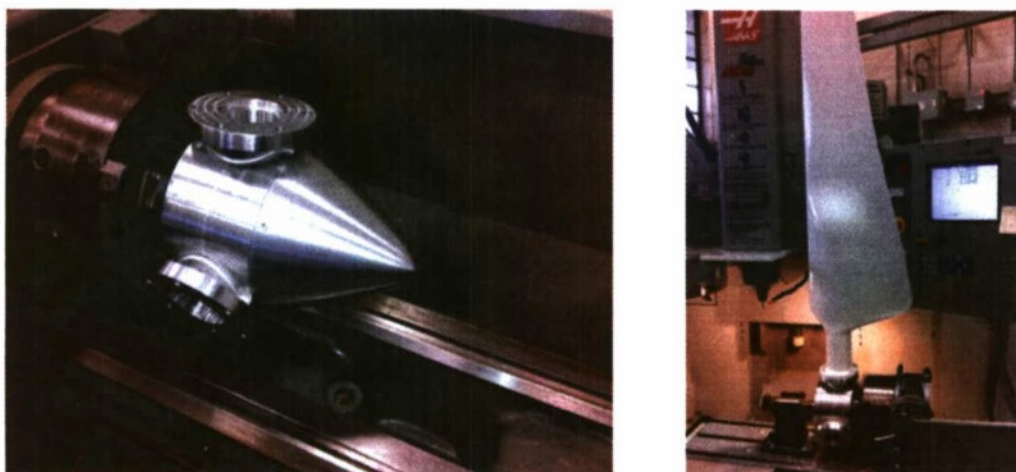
HUB, DURING FINAL MACHINING STEP (LEFT, WITH ATTACHED SPINNER), AND WITH ASSEMBLED BLADES (RIGHT)
